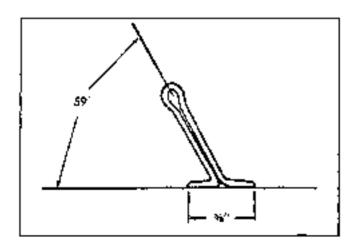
That Fer Removing Upper Half of Main Bearing
